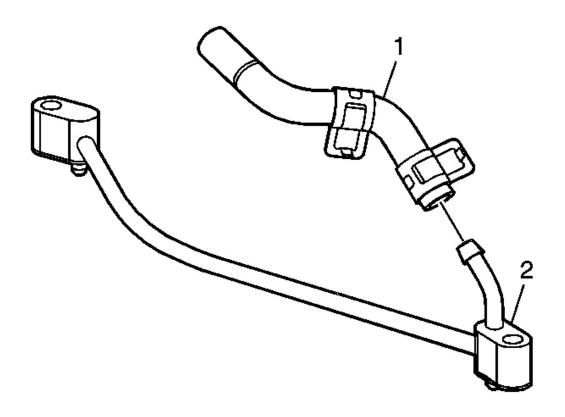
Coolant Air Bleed Hose & Pipe Courtesy of GENERAL MOTORS CORP.
